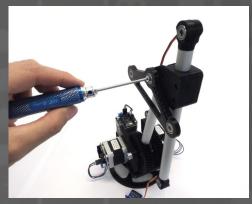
Tighten the M4 bolt till there is no slack but free movement of the parts.
